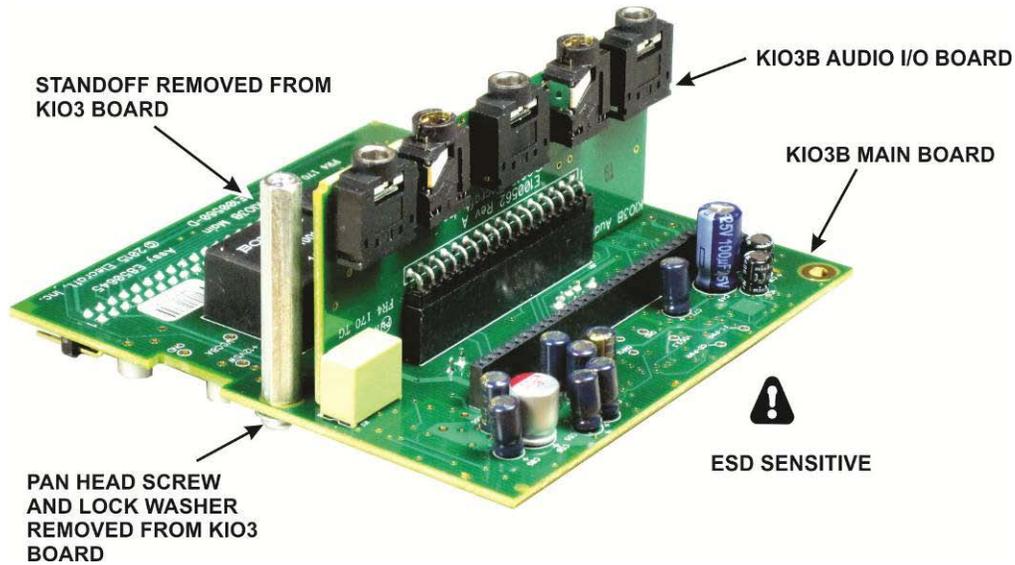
Mounting the Standoff and Audio I/O Board on the KIO3B Main Board.
